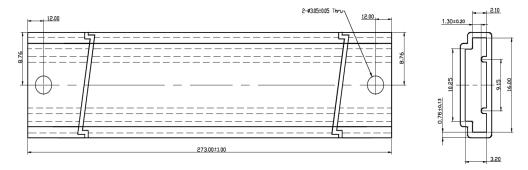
Tube dimensions for L2C5-xxxx1202x060x.
